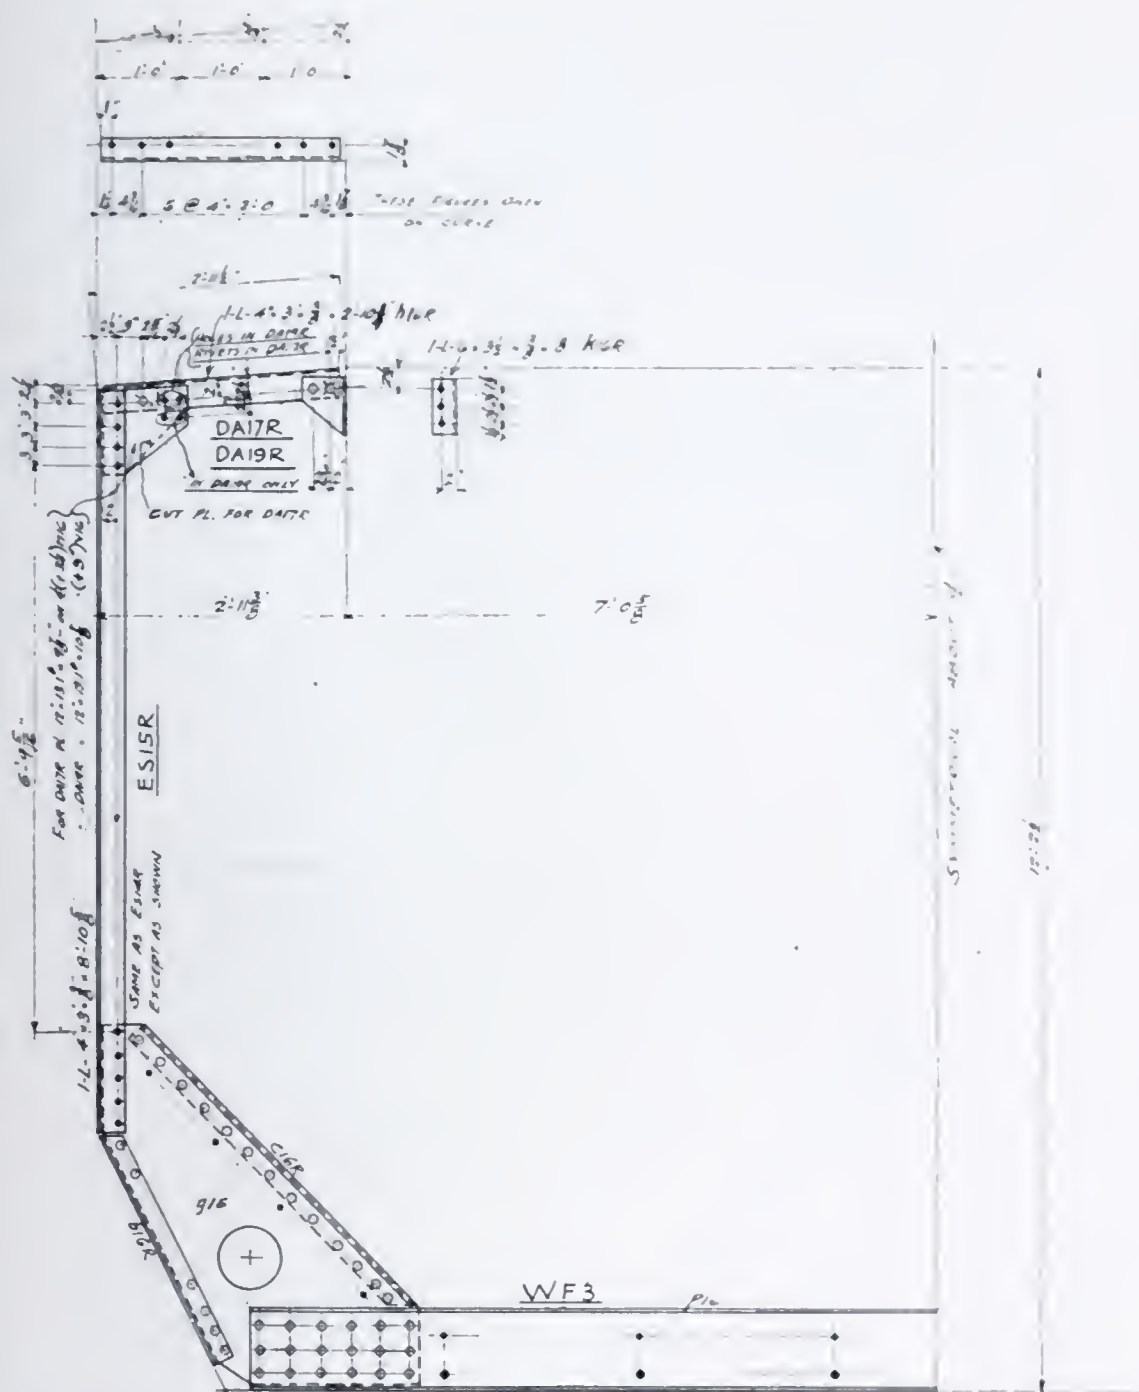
Steel Cargo Barge for Erie Canal. Intermediate Frame Details.
